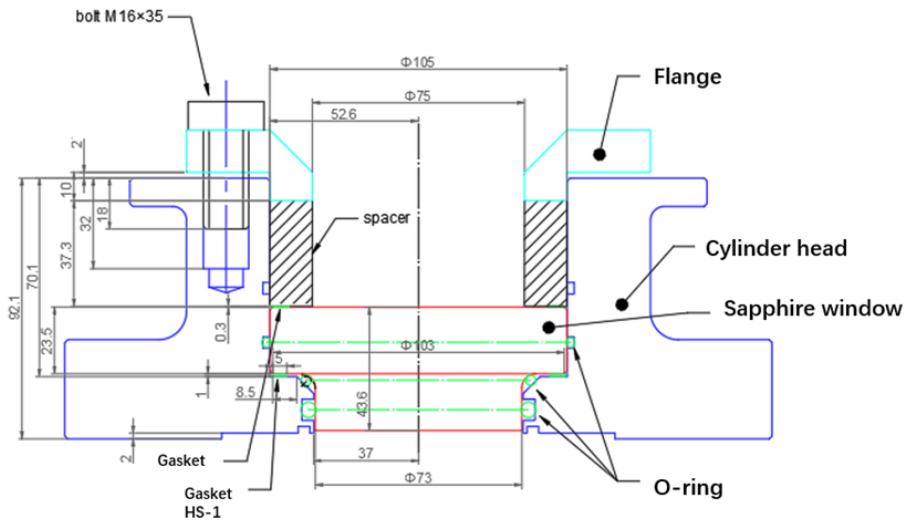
Drawing of assembly drawing of combustion chamber visualization parts
